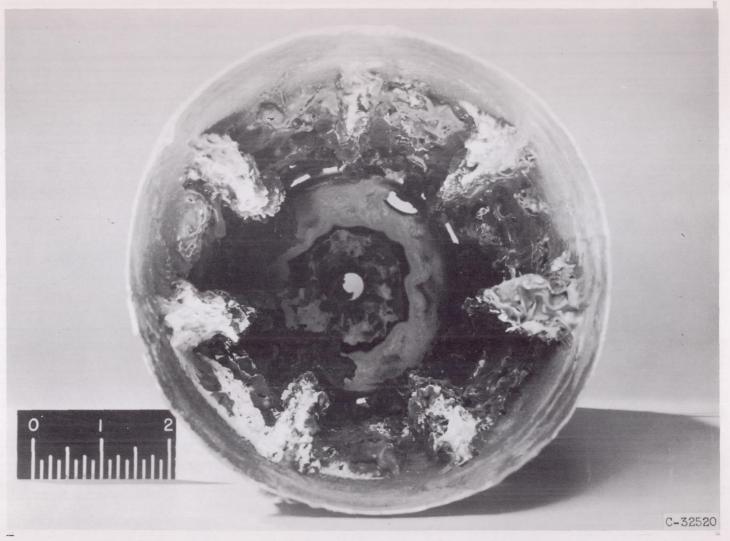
J33 single combustor after 2-hour test run with trimethylborate - methyl alcohol fuel blend at condition A.
